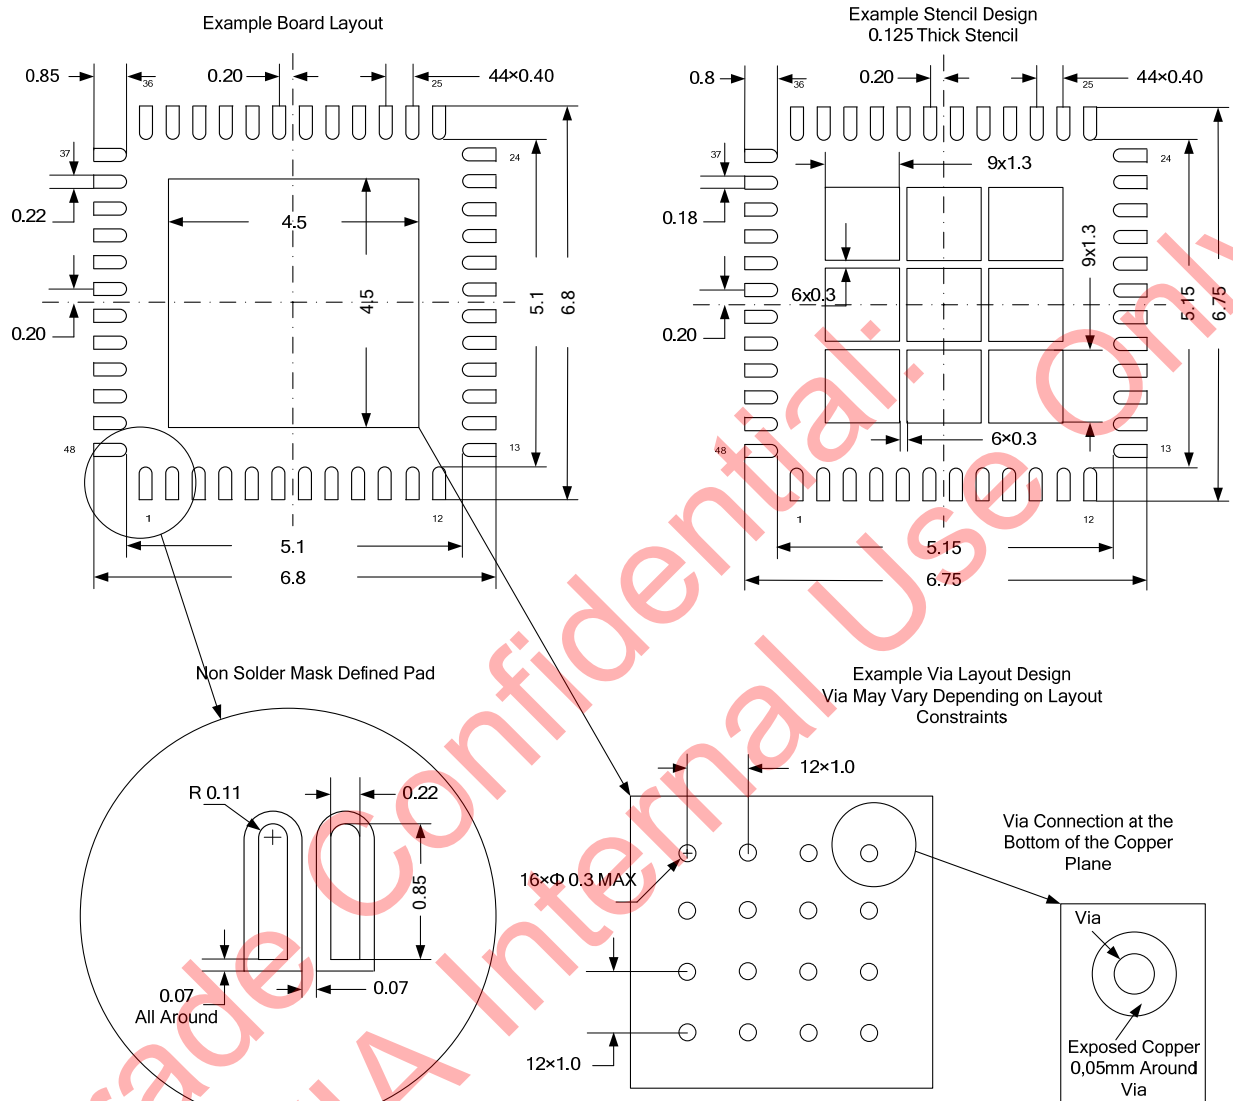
The Exposed Thermal Pad Layout Guidelines – QFN48
